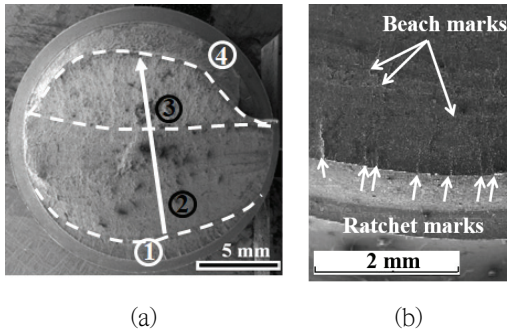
(a) Fracture surface. (b) Fracture origin
